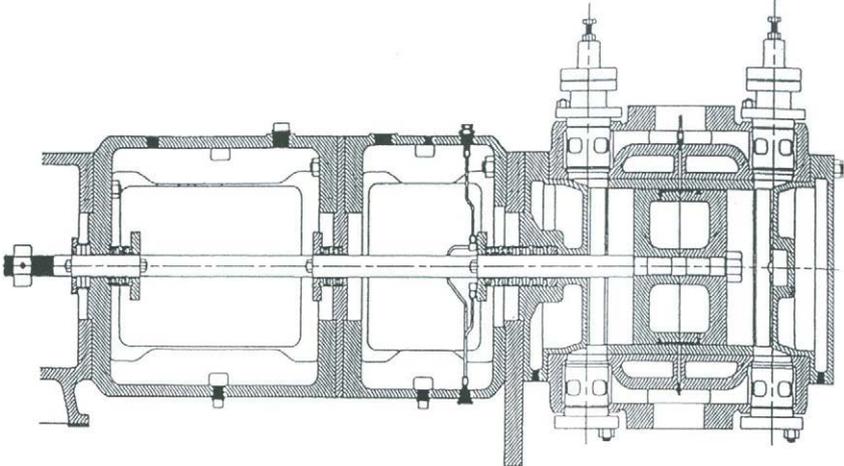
Penn process compressors (Courtesy of Cooper Industries)
